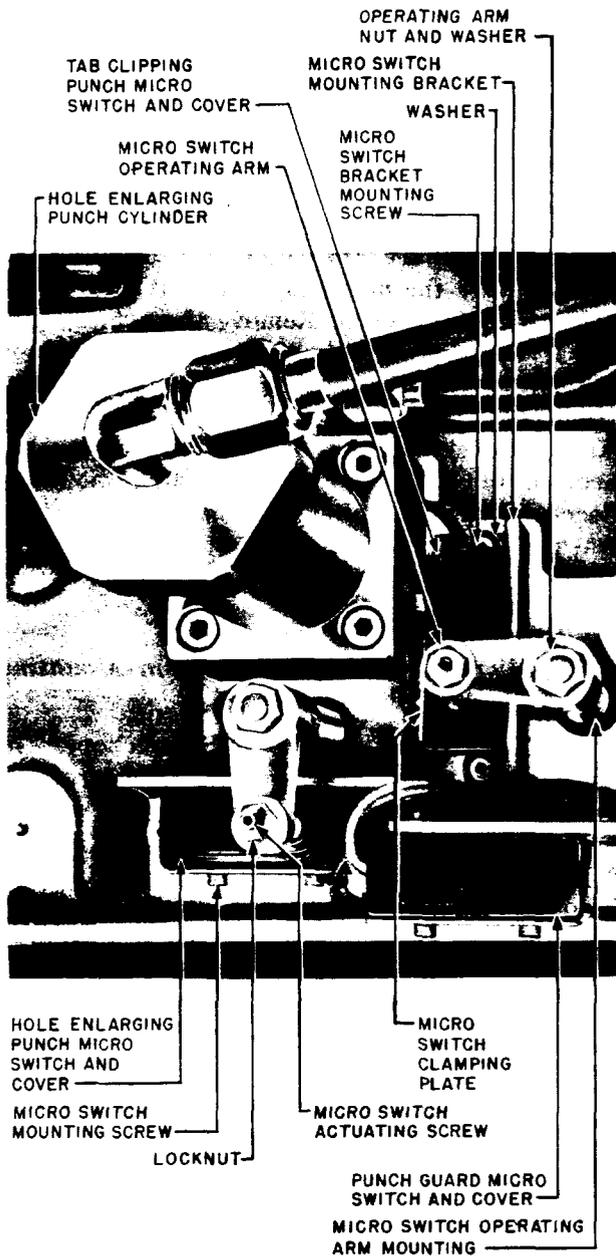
Hydraulic Shelf Assembly Micro Switches and Associated Parts (viewed from top)
